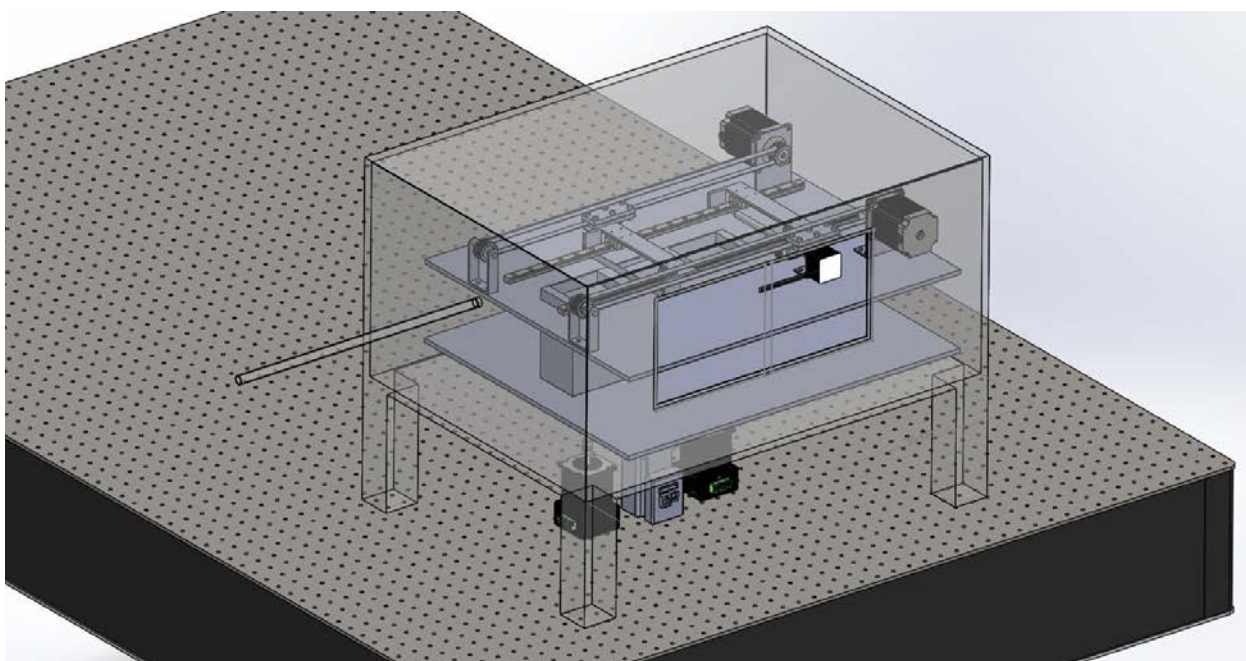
CAD model of the sub- assembly excluding the vacuum pump
